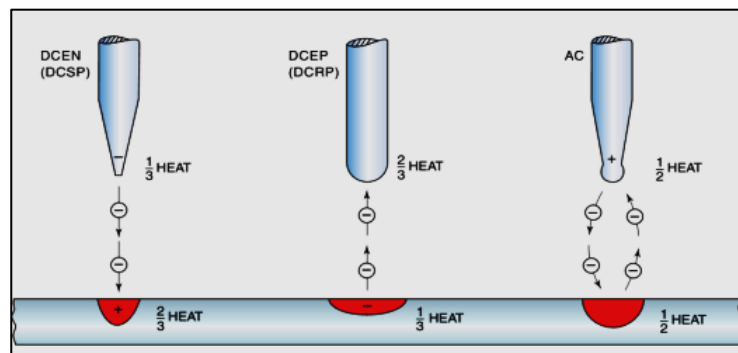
TIG welding Heat dispersion in the welding current method
